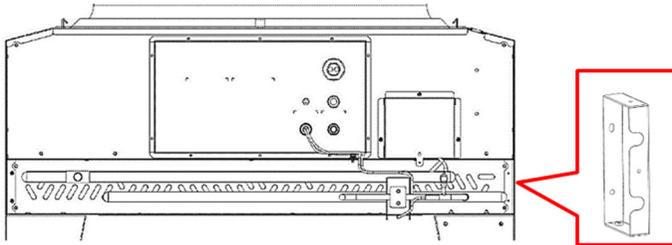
Lock the Screws at the Bottom)
